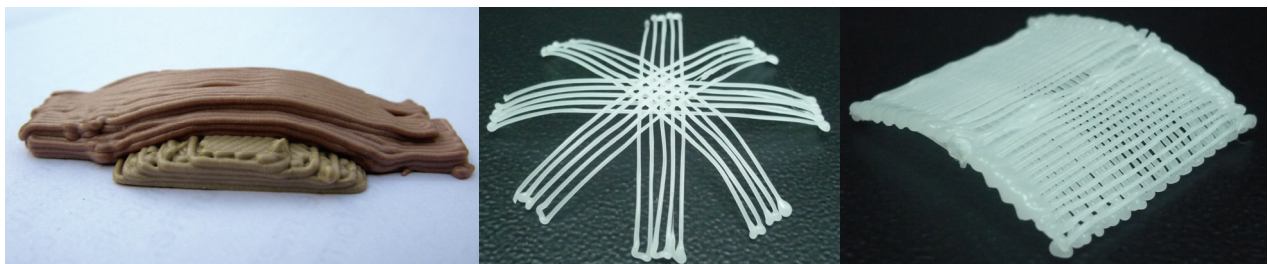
curved layer part produced by modified Fab@home rapid prototyping machine, And curved layer part produced by the National University of Singapore machine.
